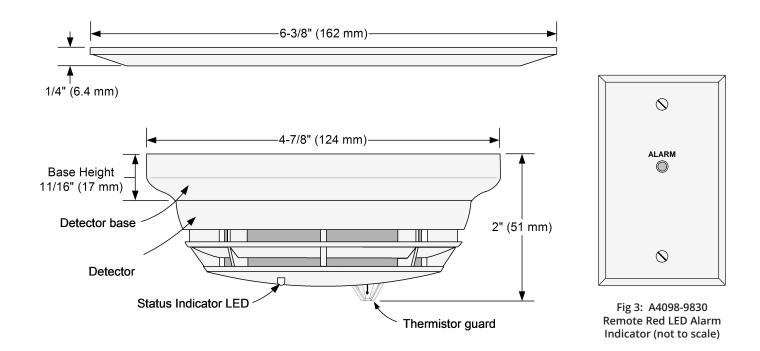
4098-9832 Adapter Plate and A4098-9602 Dimensions mounted on plate
